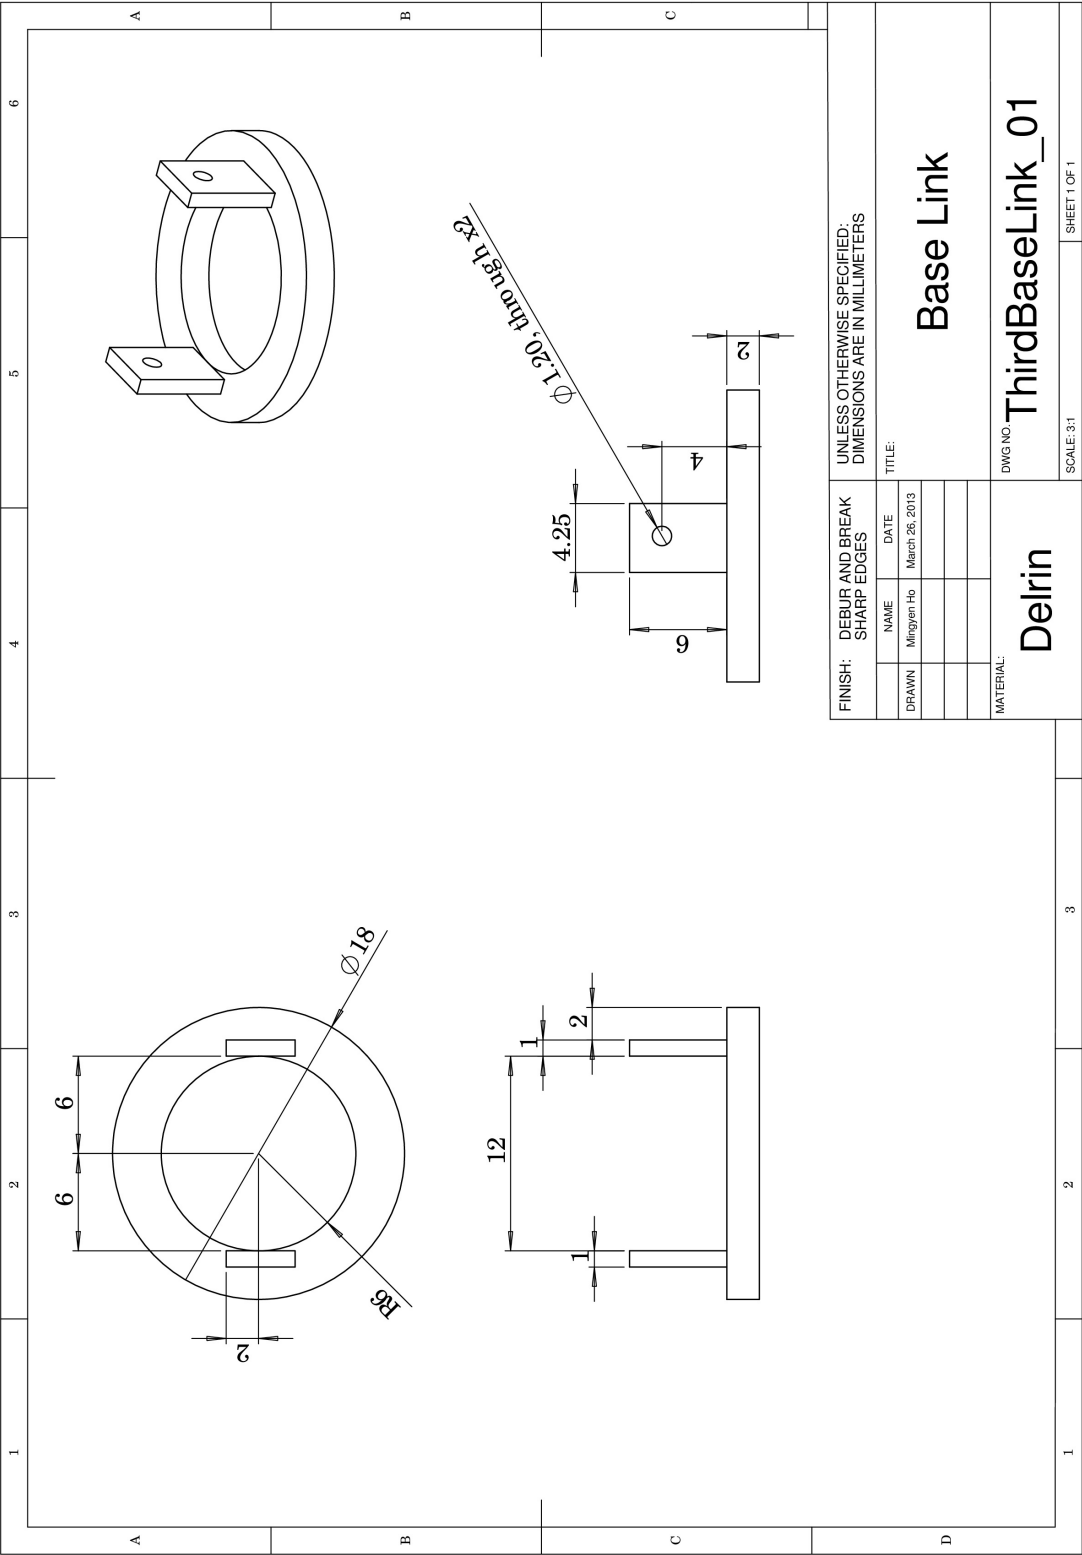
Engineering drawing of the base link of the SMA spring actuated MINIR.
